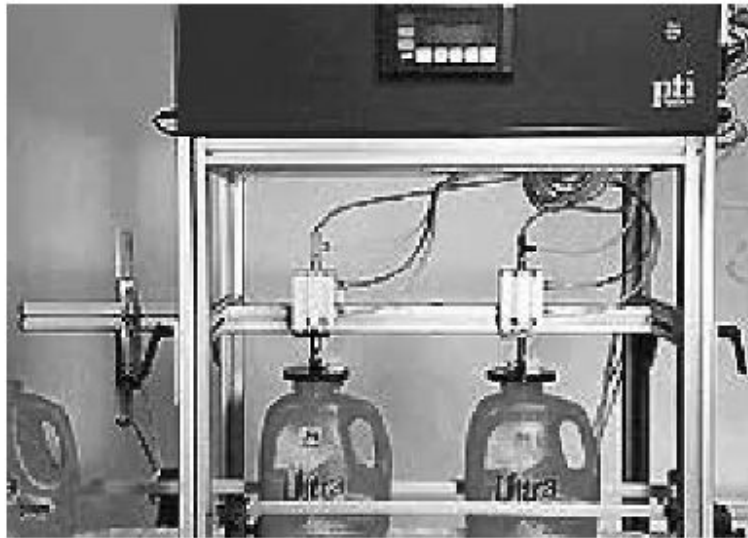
Container inspection systems using pressurized air to detect holes or weak spots in blow-molded containers. (Courtesy of Packaging Technologies and Inspection, Tuckahoe, NY.)
